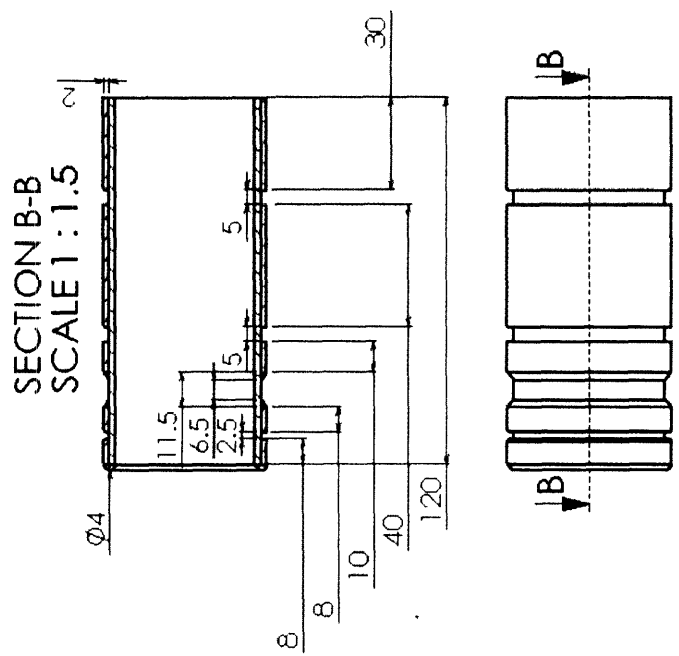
Acrylic cylinder engineering drawing (dimensions are in mm).
